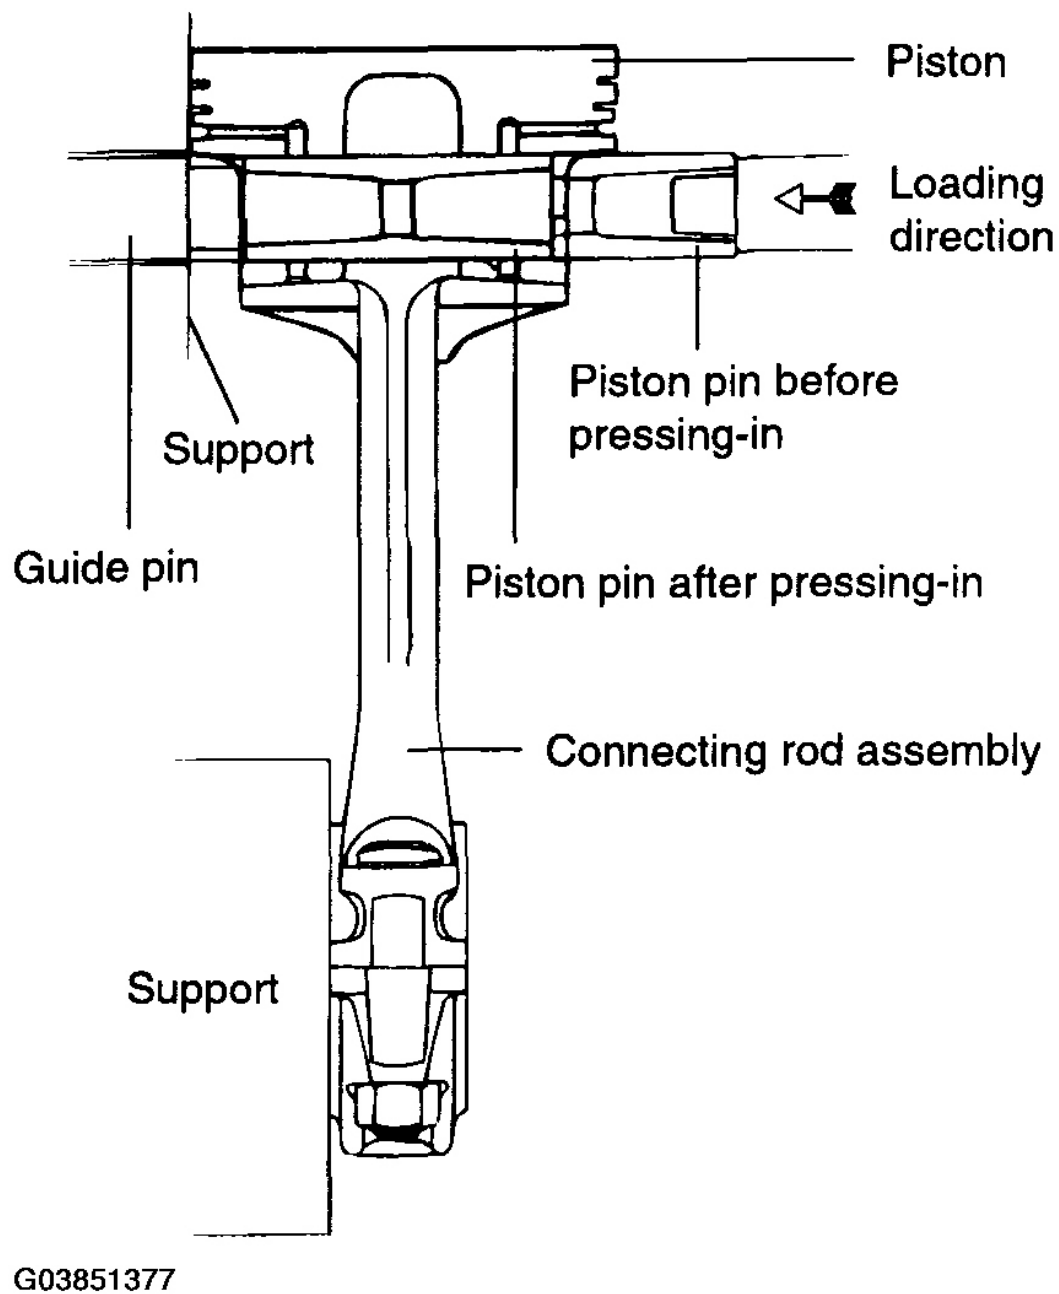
Pressing Piston Pin Into Connecting Rod Until The Sleeve On Installing Arbor Contacts The Top Of The Tool Arch
